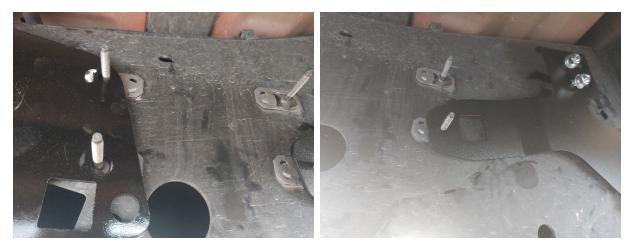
Front (Left & Rear (Right) Horn Brackets Placed Over Module Studs
